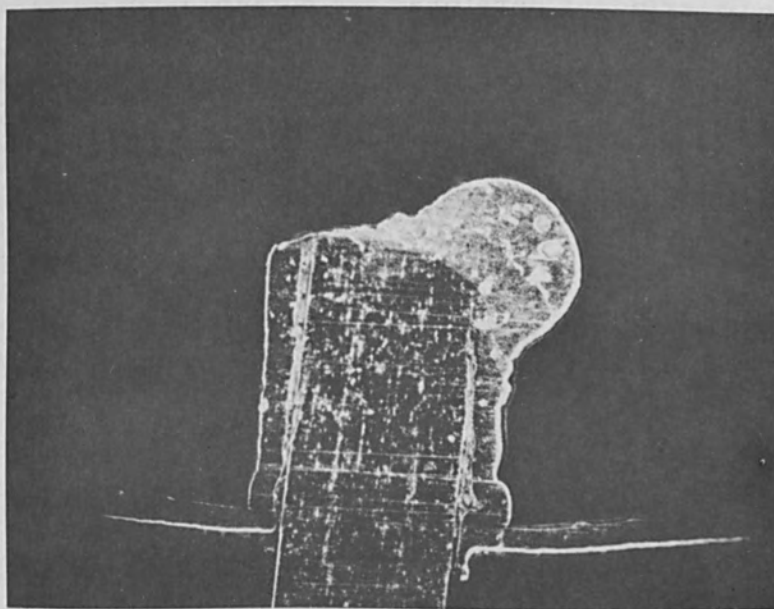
Laser weld of nickel wire to Polyweld.
